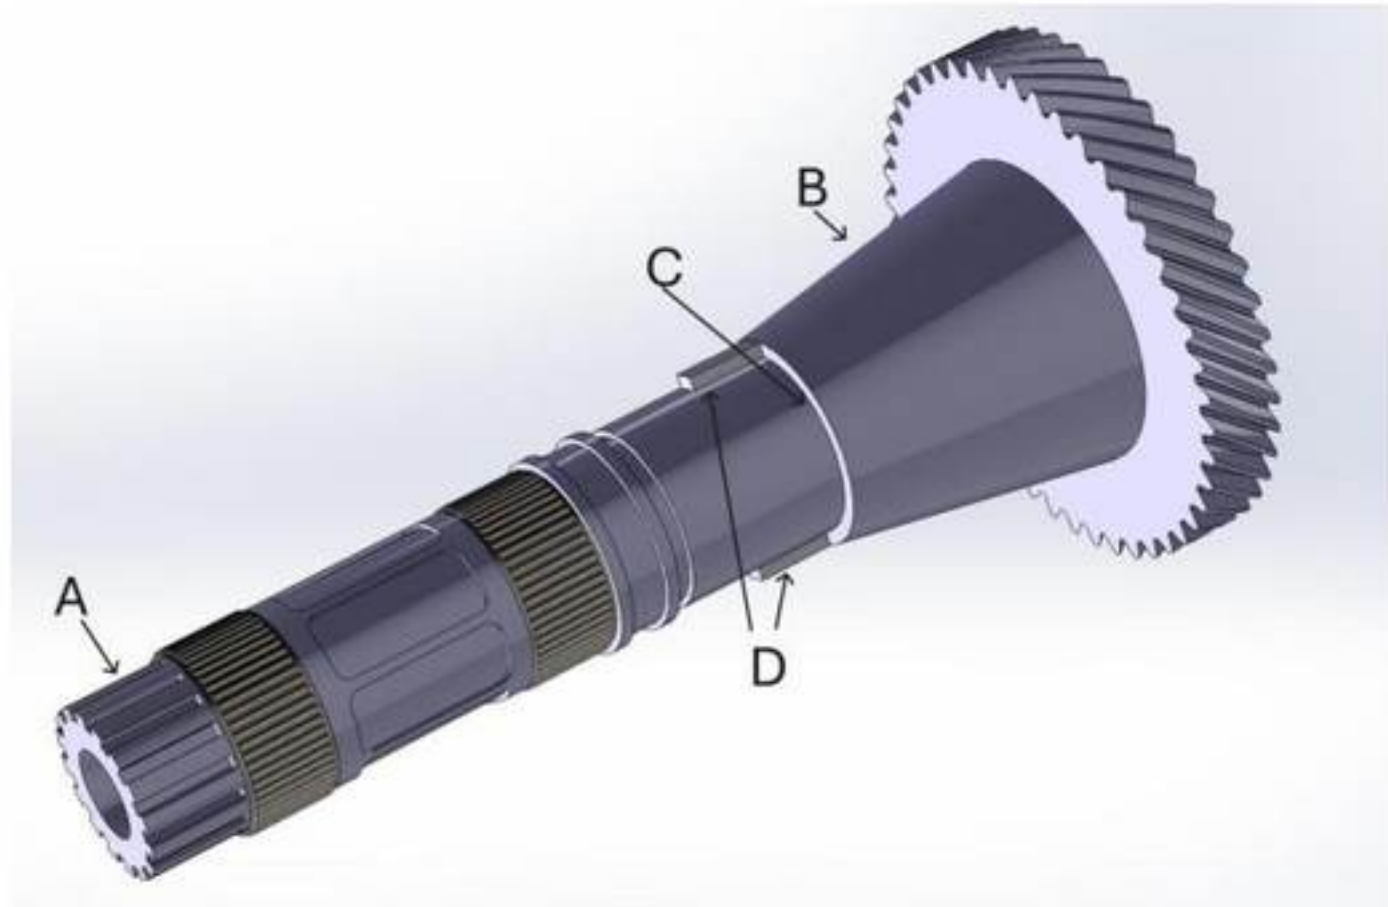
CAD Model of Outer Drive Shaft based on an open-source CAD model [19].
